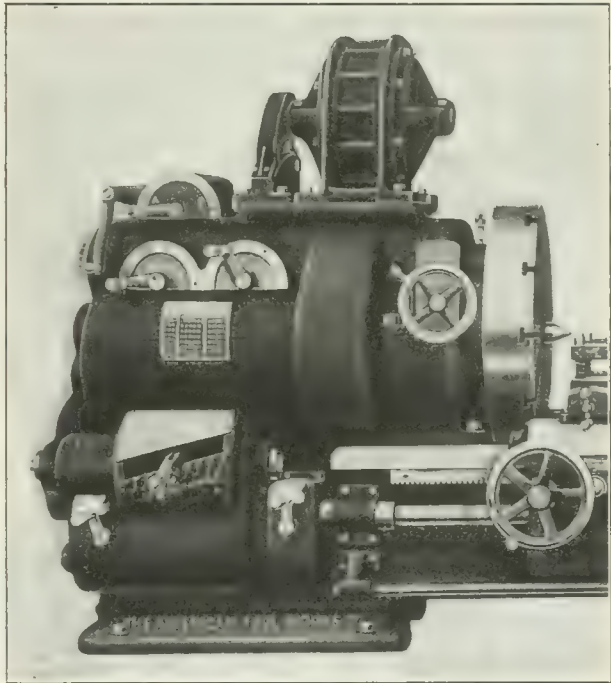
The Headstock of the Motor-Driven Geared Head Pattern.
